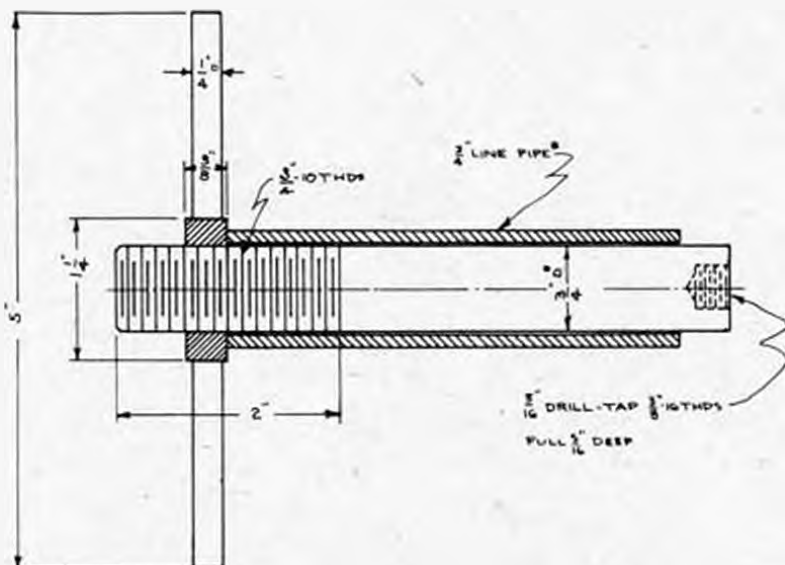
Non-magnetic retracting tool for rendering safe procedure in Mine Mk. 21. This tool is used to retract and lock out the hydrostat spindle of the HS-1 mechanism in the mine Mk. 21.
